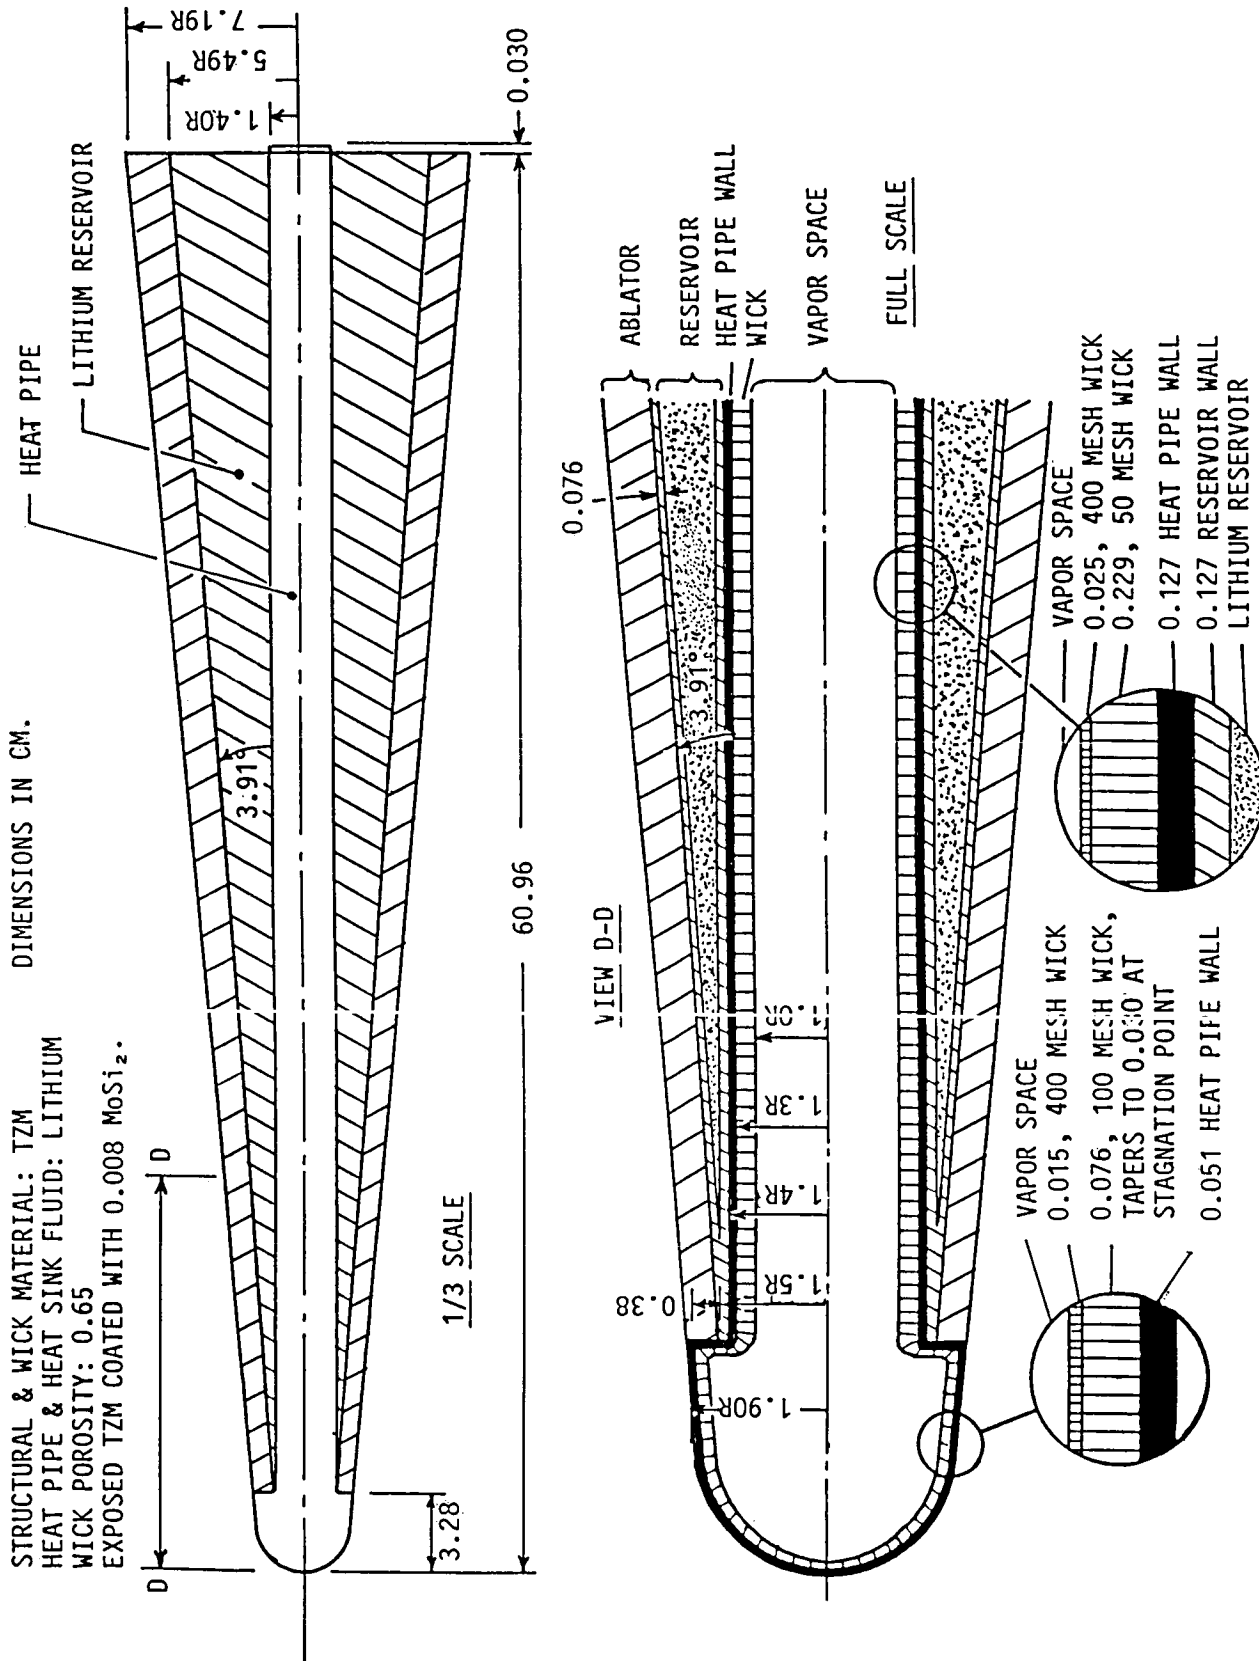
Preliminary Design of Reference Sensible Heat Pipe Cooling System
